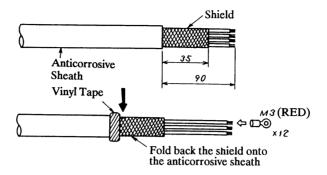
Fabricating cable connected to terminal board TB-D1 in Raise/Lower Control Box
